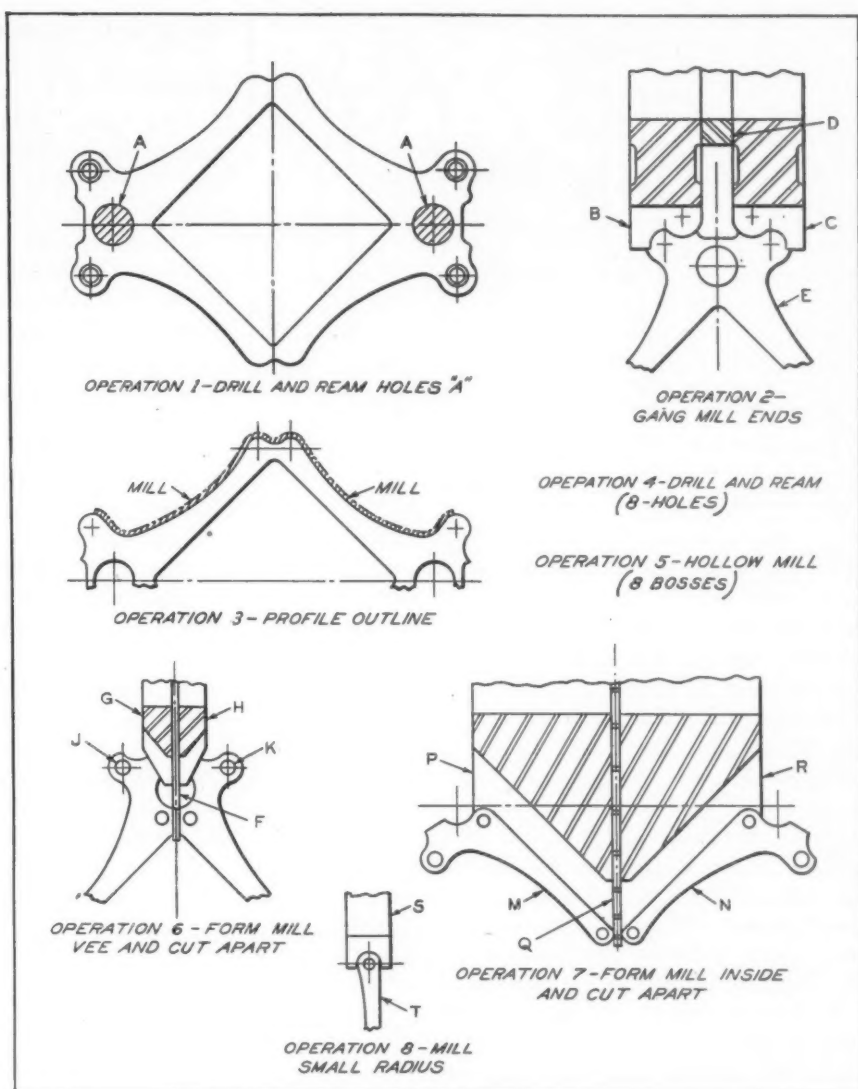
Views Showing Operation Sequence for Machining Pawl Levers
